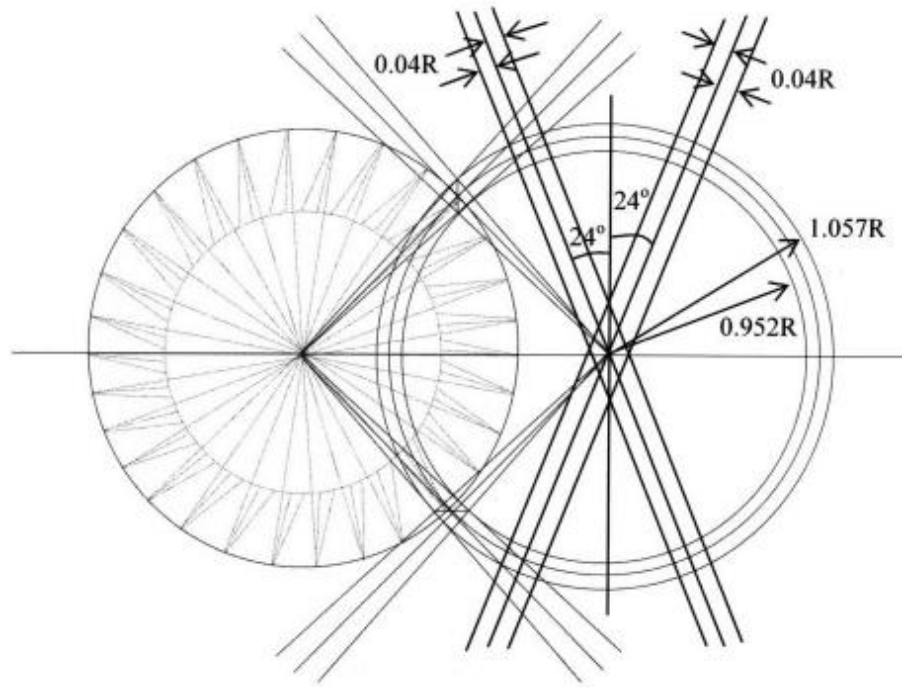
Construction lines to form the pallet (Hill F. A., 2008)
